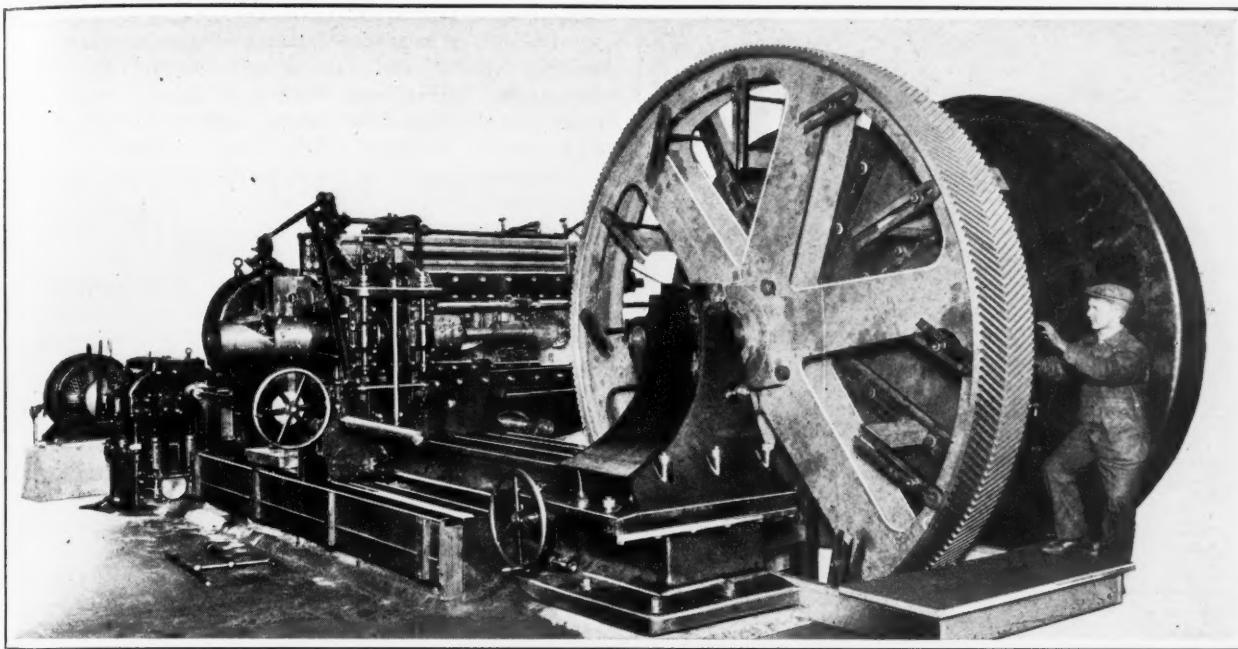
Sykes Gear Generator which has a Capacity for Gears up to 18 Feet in Diameter
